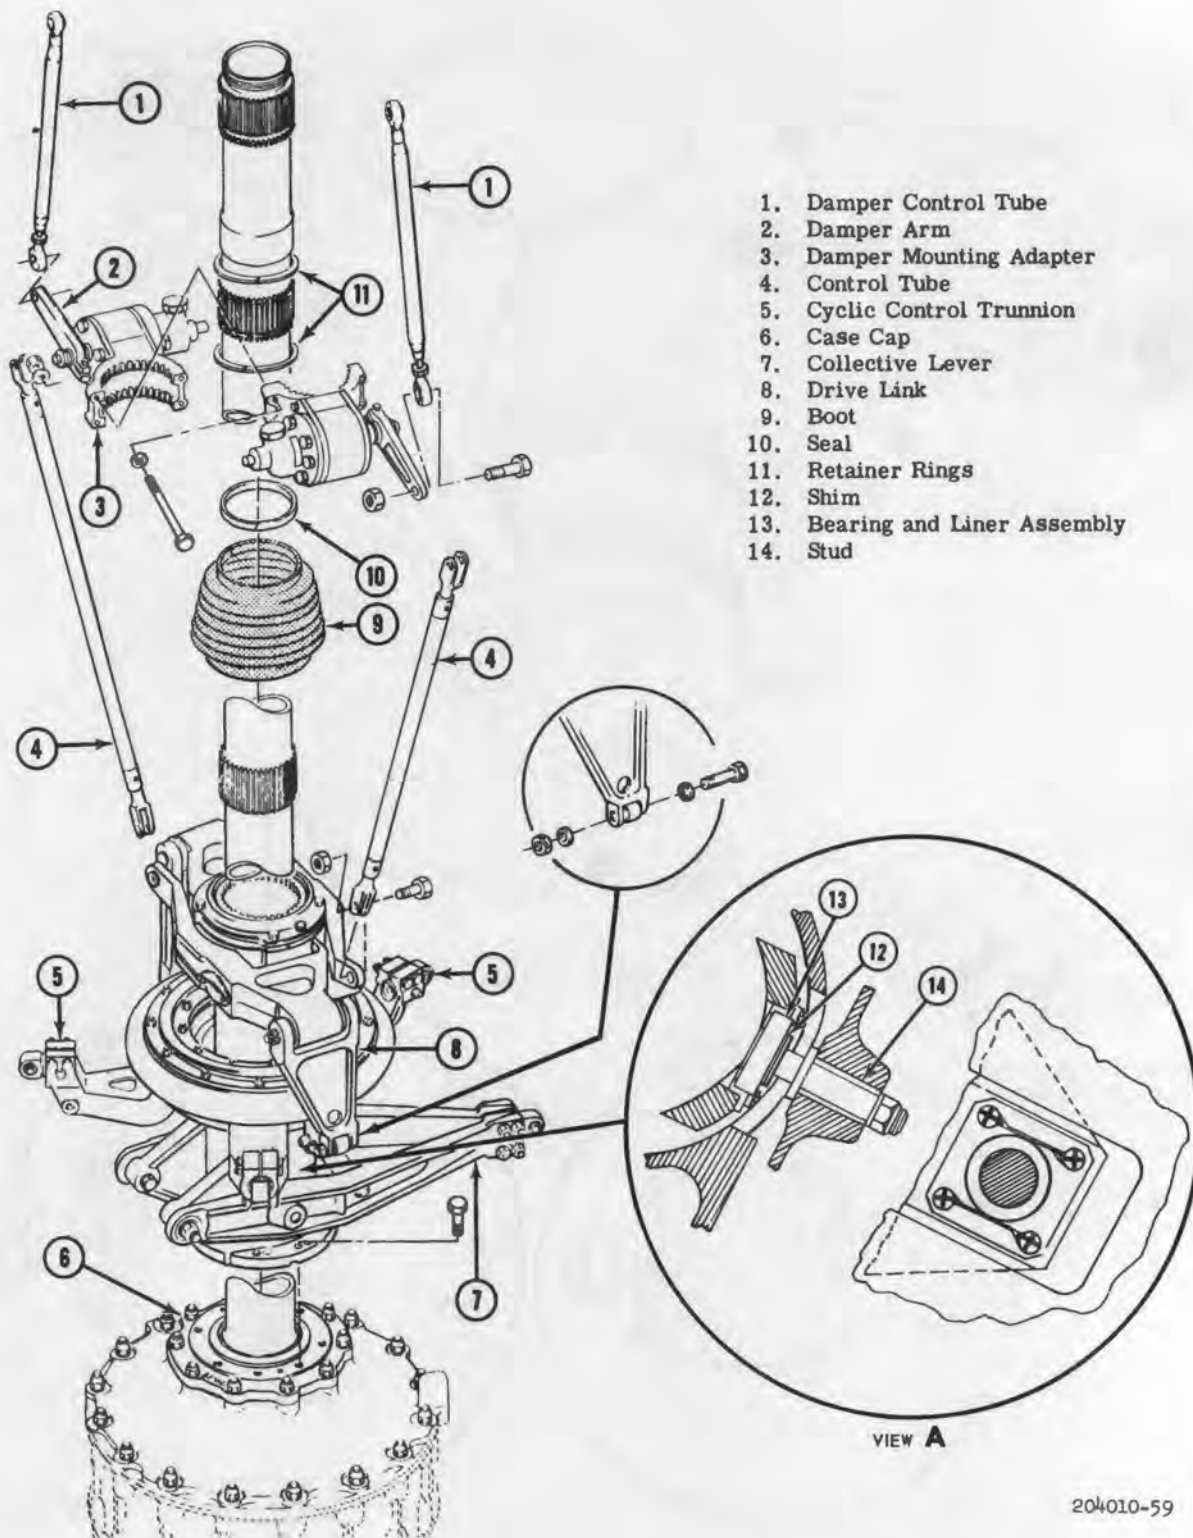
Stabilizer damper and adapter assembly (UH-1B Serial No. 60-3546 thru 64-14100)
